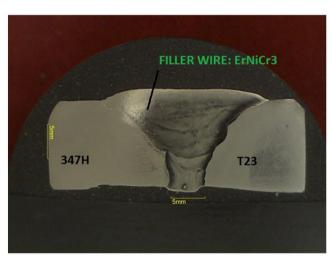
Combination of 347H+T23 welded with filler wire ERNiCr3.
